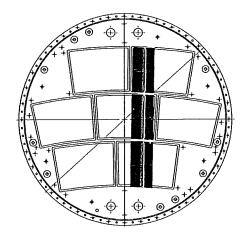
Drawing of the Large Prototype endplate with three GEM modules partially equipped with readout channels. This figure shows the profile of the beam, from an overlay of a full measurement run, superimposed onto a CAD drawing of the endplate (seen from the inside of the TPC) [4].
